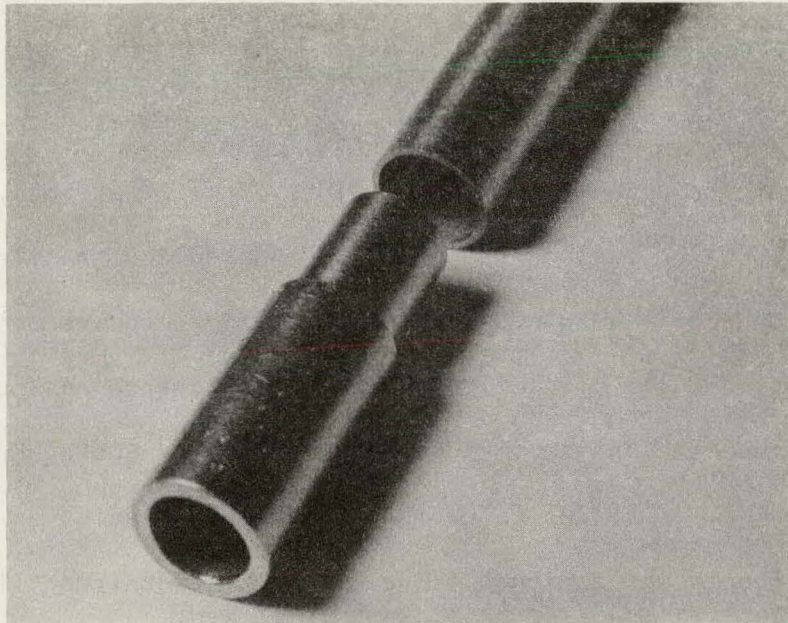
Typical shoulder-weld end cap for stretch bonding.
